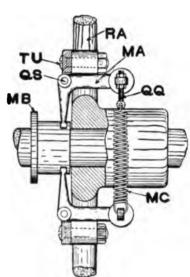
Detail Parts of Horizontal Gasolene Engine. Fairbanks-Morse & Co.
